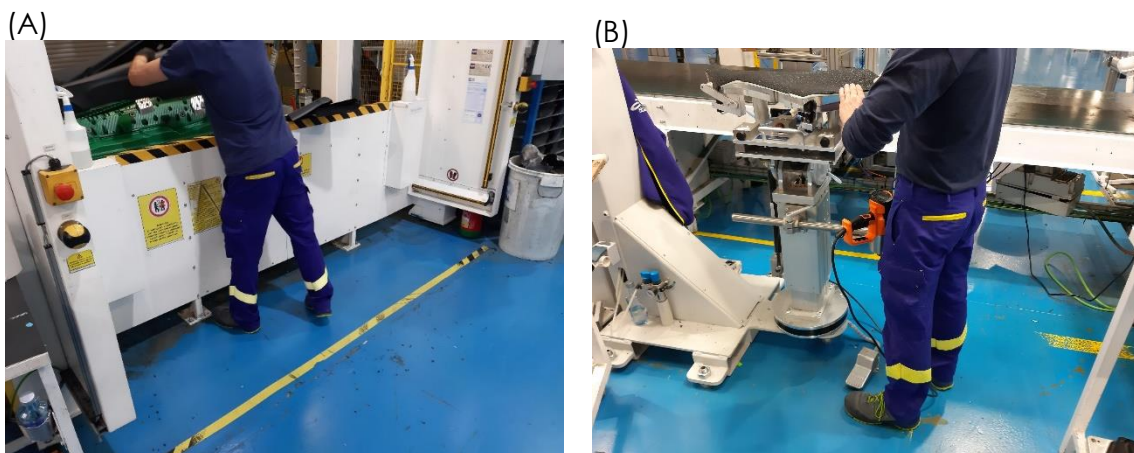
Examples for Production Workplaces; (A) Welding work-position: Assembly + machine feed (B) Manual dress work-position: Manual dress of pieces (pictures: Grupo Antolín).
